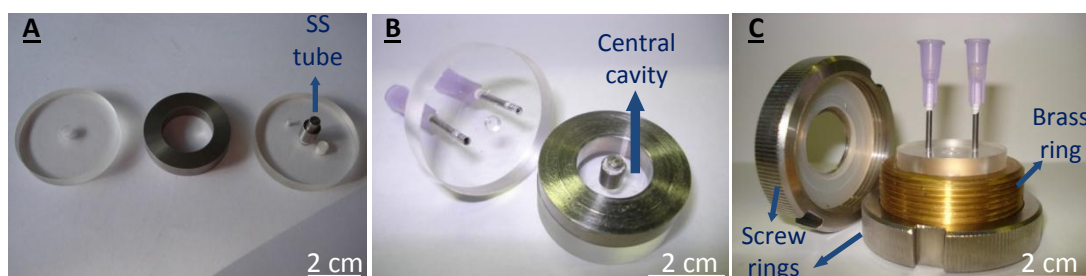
Assembly of a UV-transparent mold for the production of a dummy donut-shaped polymer packaging (mold design 1)
